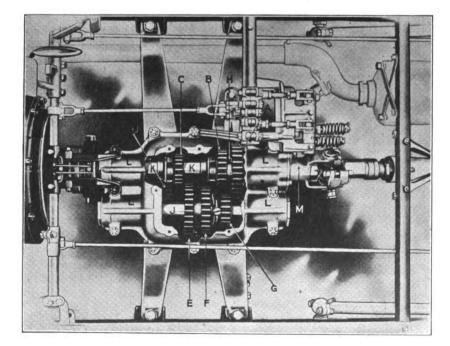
SHOWING THE TRANSMISSION GEARS OF THE CADILLAC FOUR-CYLINDER CAR
